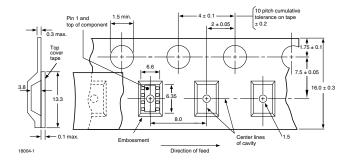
Tape Dimensions, 2000 Parts per Reel
